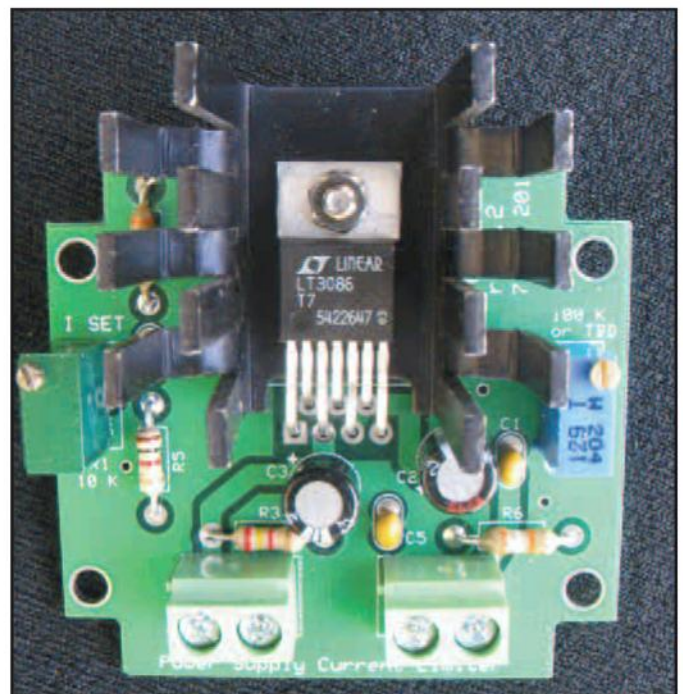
Photo C. Alternative regulator mounting on PC board, with TO-220 heat sink.
